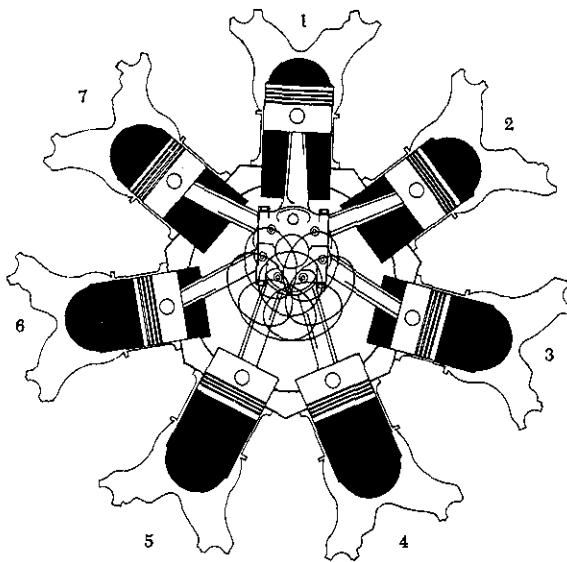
Elliptical travel path of knuckle pins in an articulated rod assembly.
